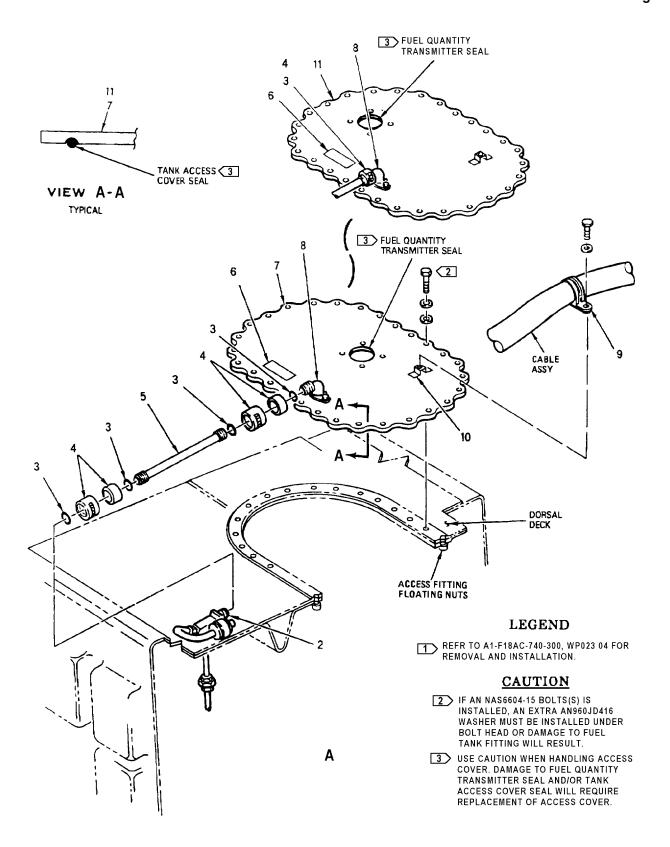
No. 2 Fuel Tank Access Cover (Sheet 2)
